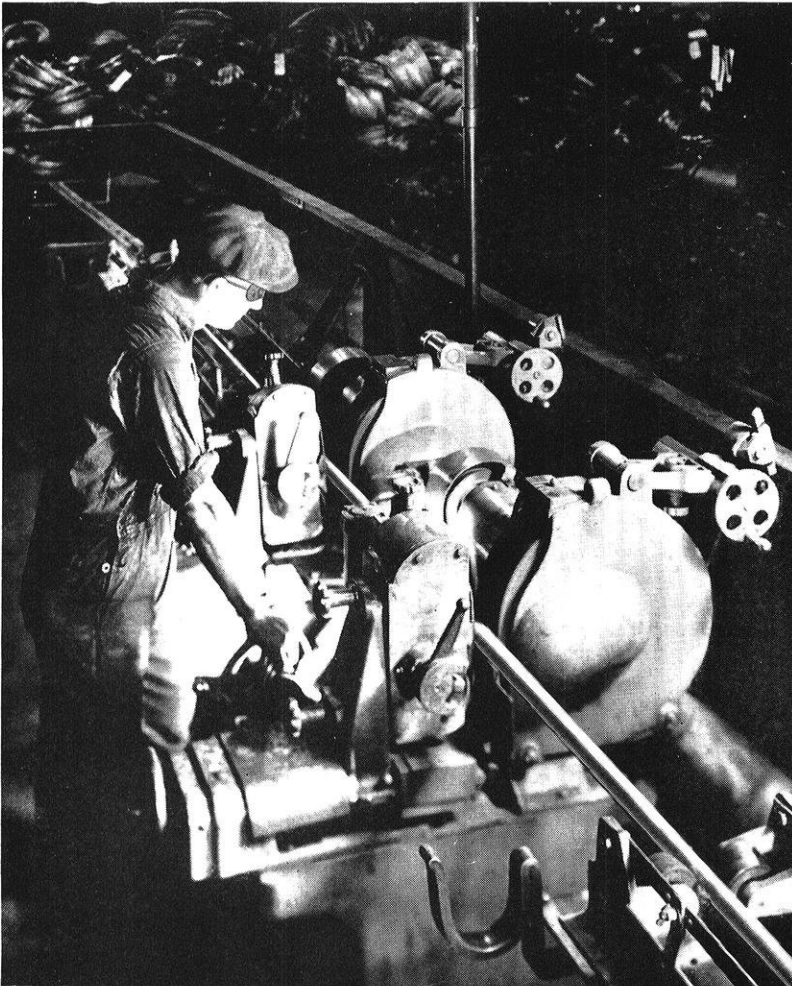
(Above). Straightening and polishing stainless steel bars, Newburgh Works, American Steel & Wire Co.
